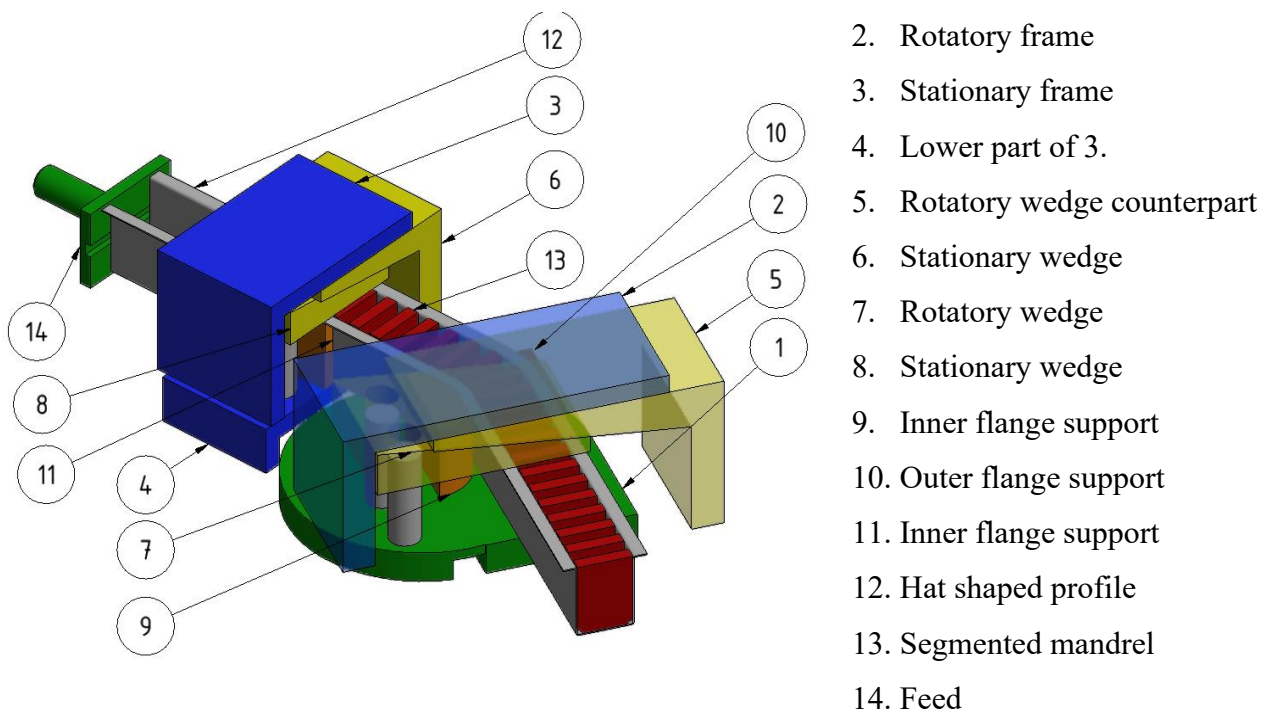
Finite element based simulation model of an ISB tool concept for a rotary draw bending machine. Transmission of clamping force by wedge sliders.
